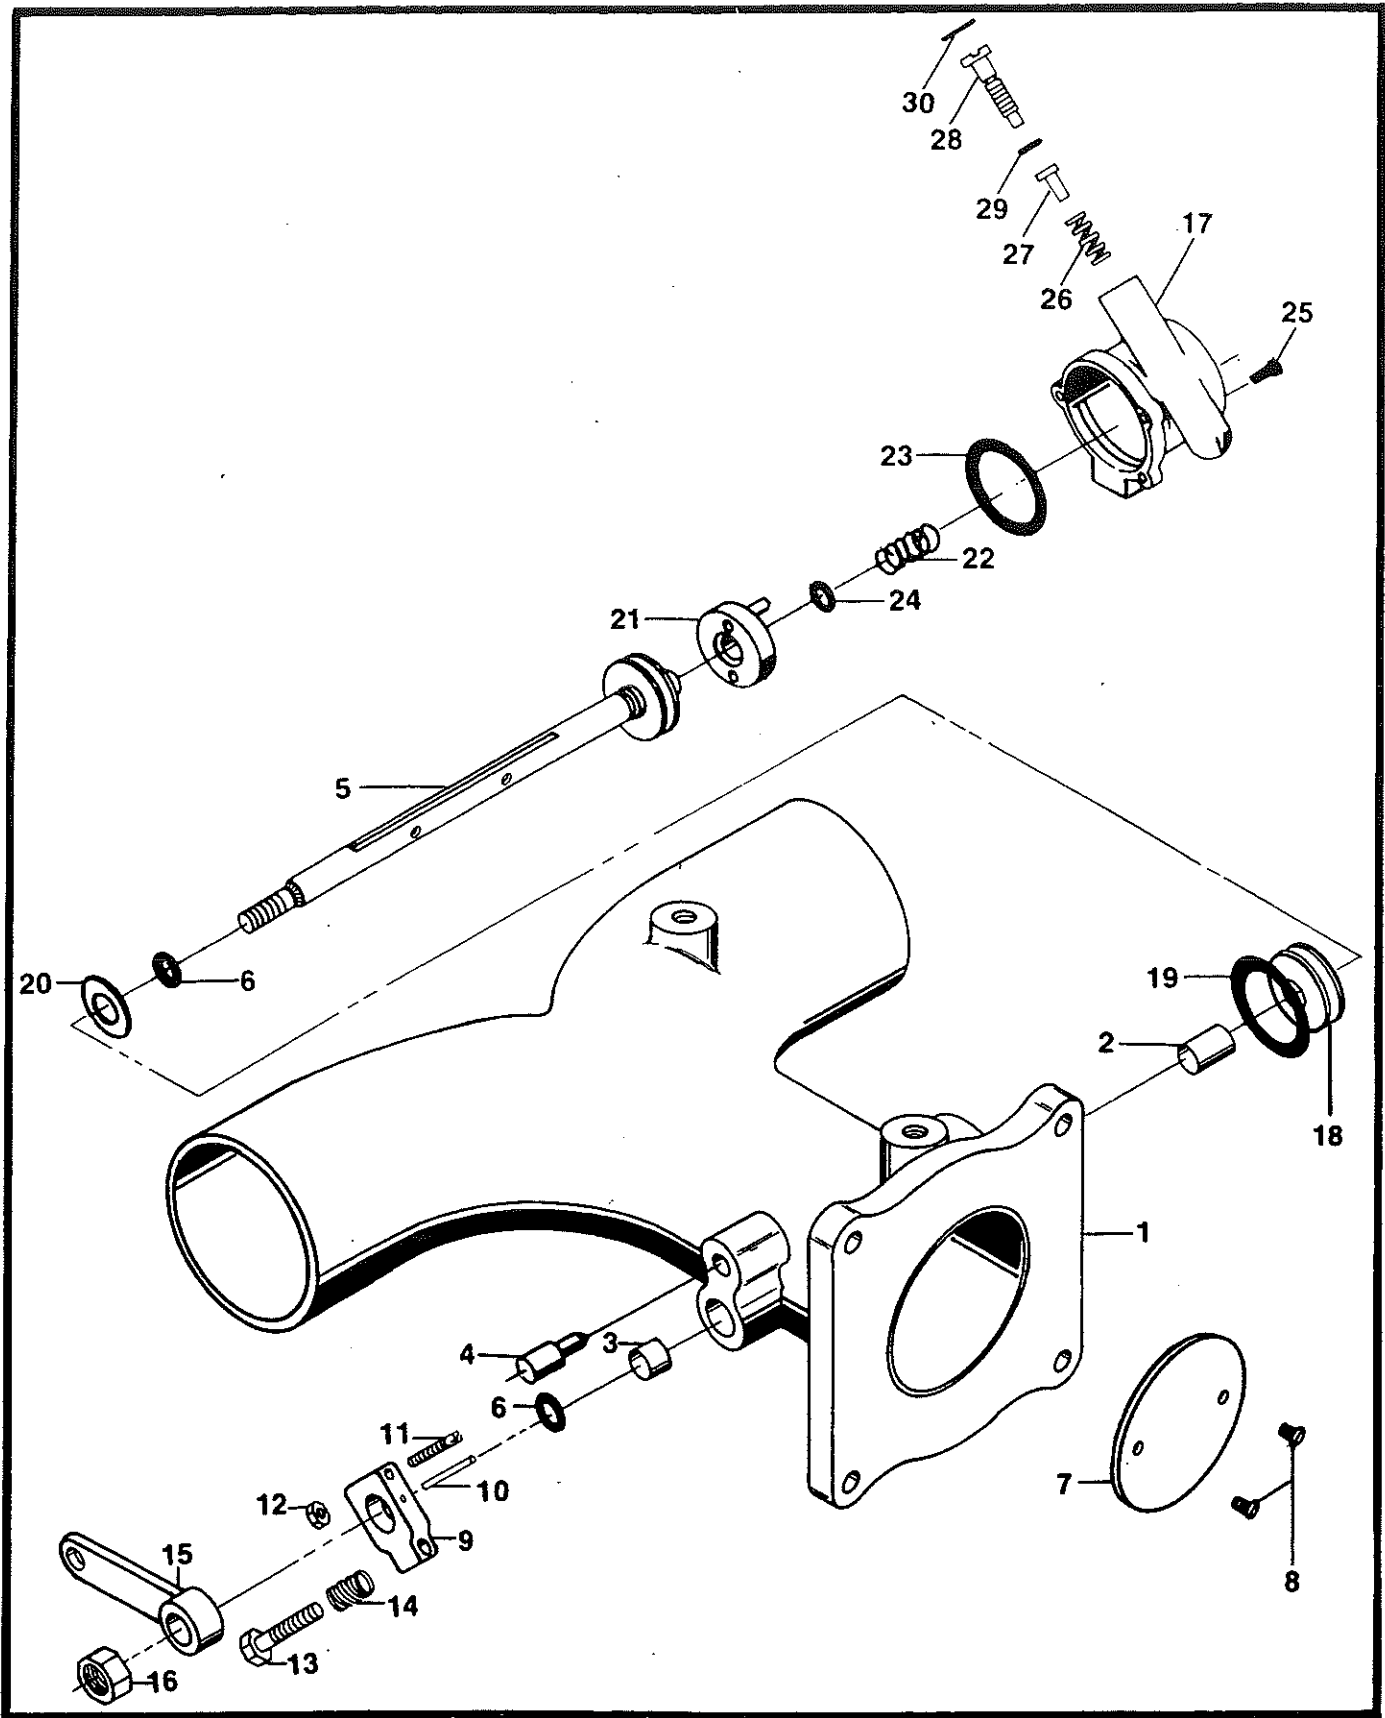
AIR THROTTLE AND FUEL METERING ASSEMBLY.
